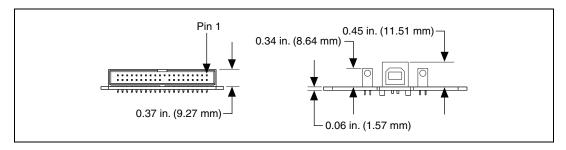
USB-8452 OEM Dimensions (Front and Rear Views)
